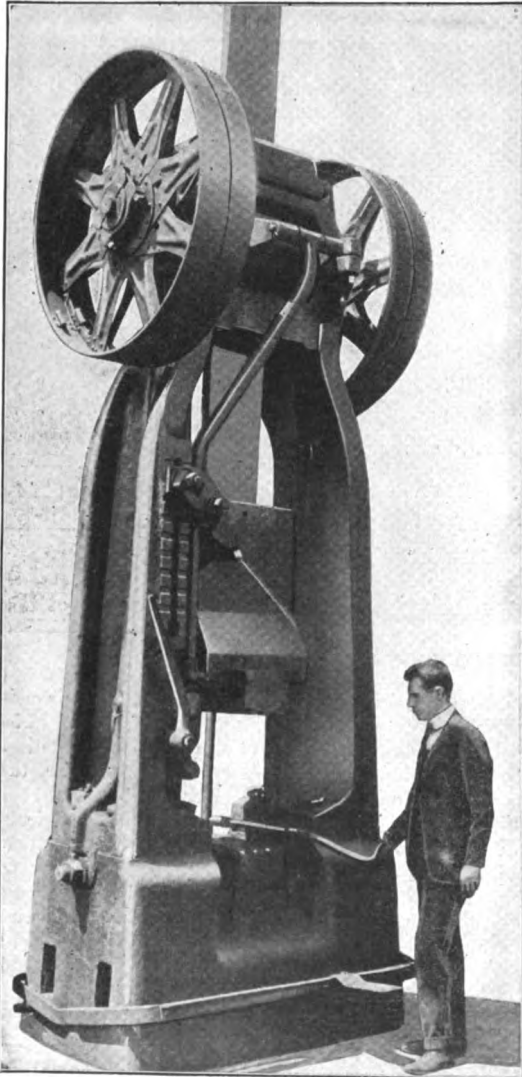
IT TAKES A BIG DROP HAMMER TO MAKE A BAYONET FORGING
